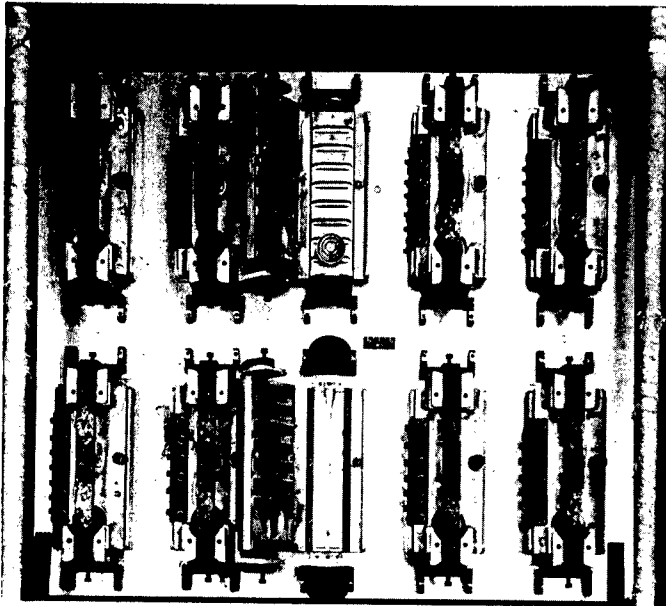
Detector-base-assembly heat-treating fixture. L-62-342
